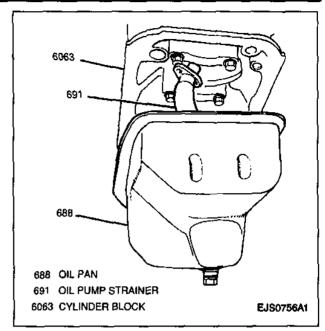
Engine Oil Pan and Oil Pump Strainer Removal
